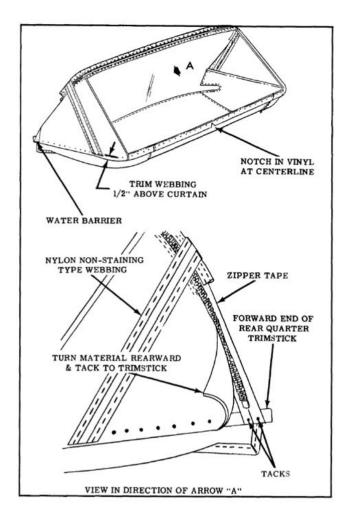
Back Curtain Installation trimmed off at rear trim stick, 1/2" above back curtain lower edge. (Fig. 16-136)
